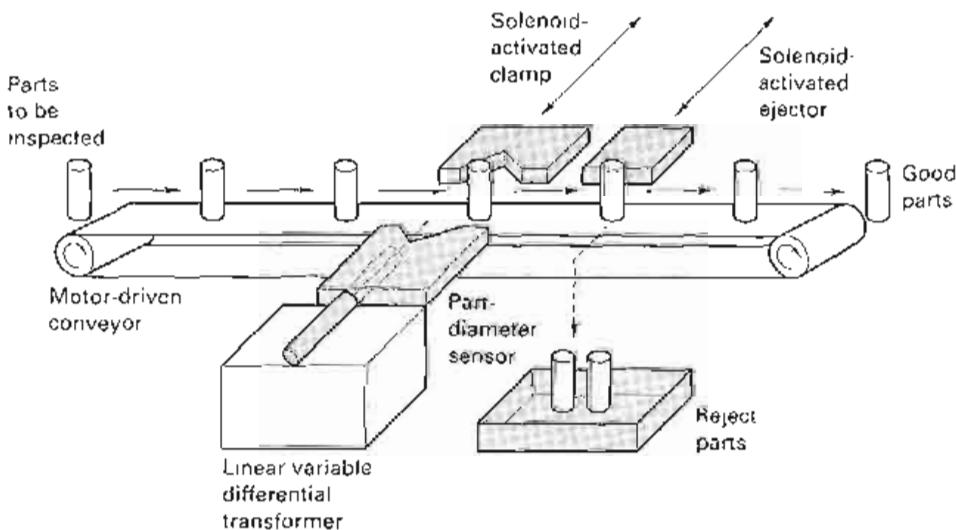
A linear variable differential transformer (LVDT) is a key element in an inspection station checking part diameters. Momentarily clamped into the sensor fixture, a part pushed the LVDT armature into the device winding. The LVDT output is proportional to the displacement of the armature. The transformer makes highly accurate measurements over a small displacement range.
